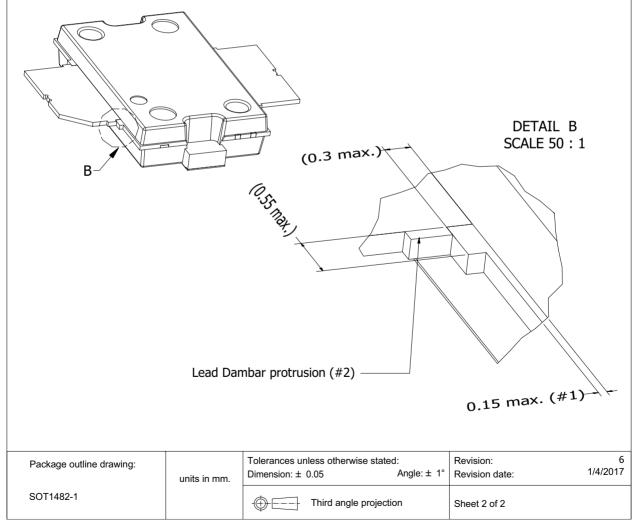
Package outline SOT1482-1 (sheet 2 of 2)
